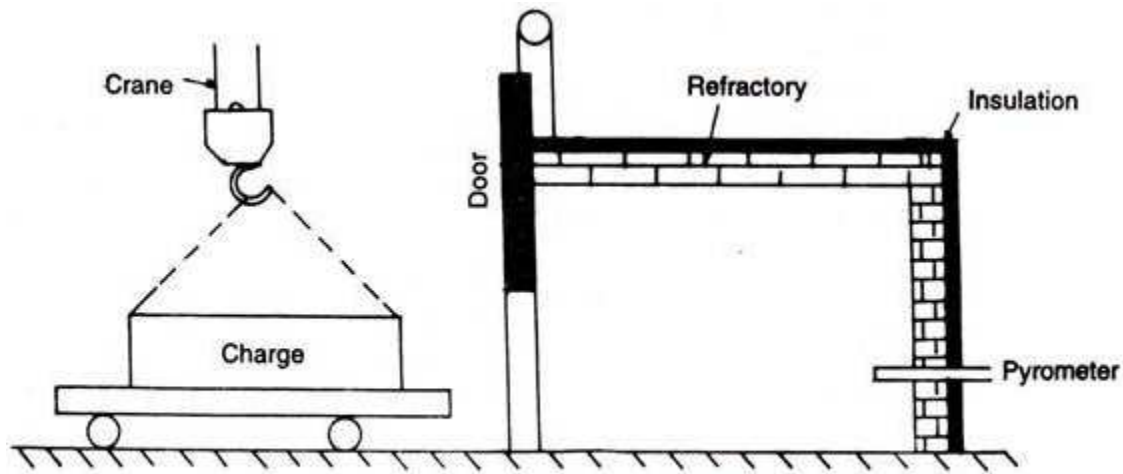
Bogie-hearth (car bottom) furnace.
